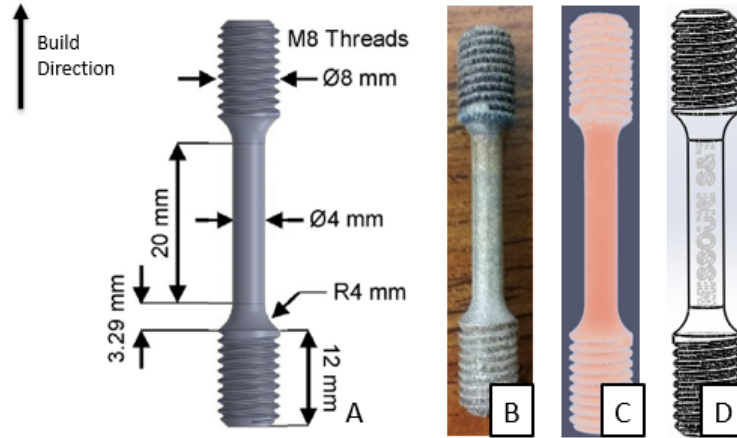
ASTM E8 tensile specimen (a), the tensile bar printed by LPBF (b), 3D reconstruction of XCT imaging (c), and CAD model showing lettering section printed at lower power (d).
